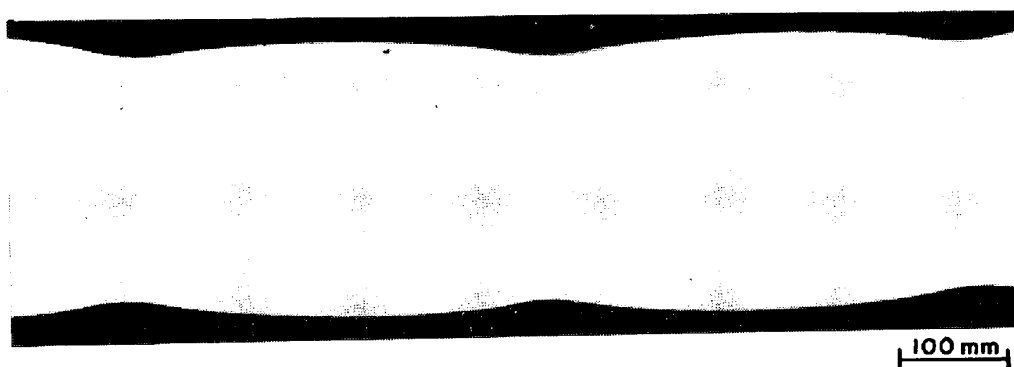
Shape of bulging of the slab completely solidified in the machine.
